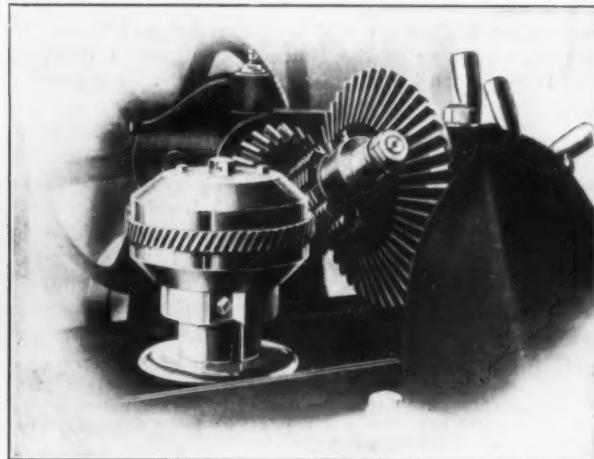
Cutting a Thin Spiral Gear of Small Bore.
